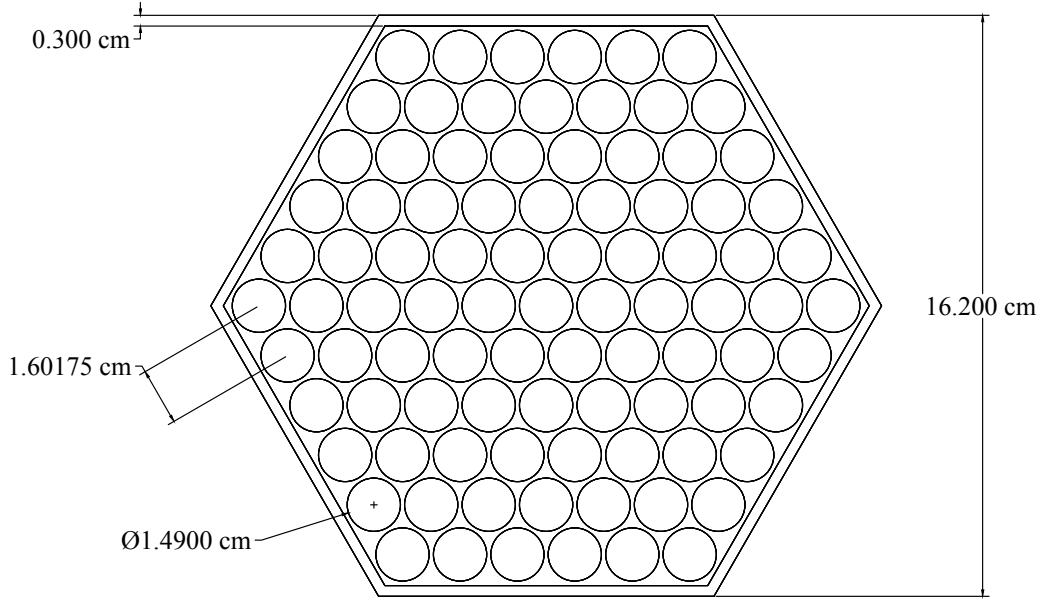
Cross-cut view of a UCFR-1000 fuel assembly (to scale).
